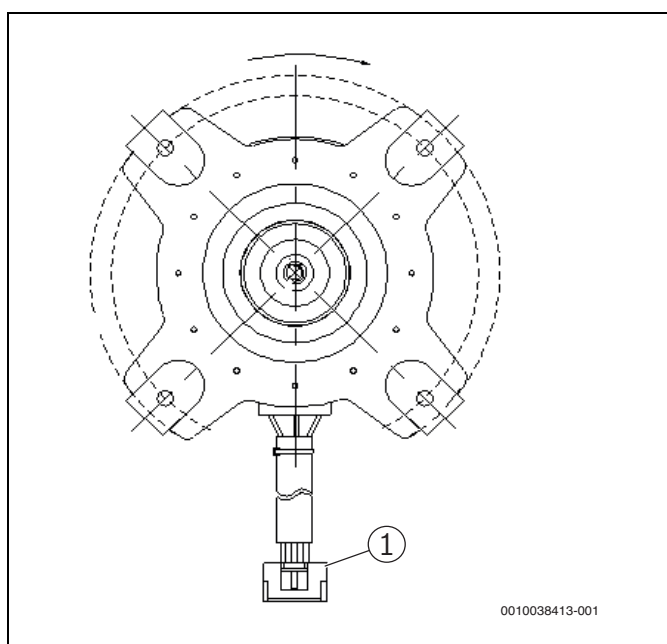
Fan motor connector (control chip is in outdoor PCB)
